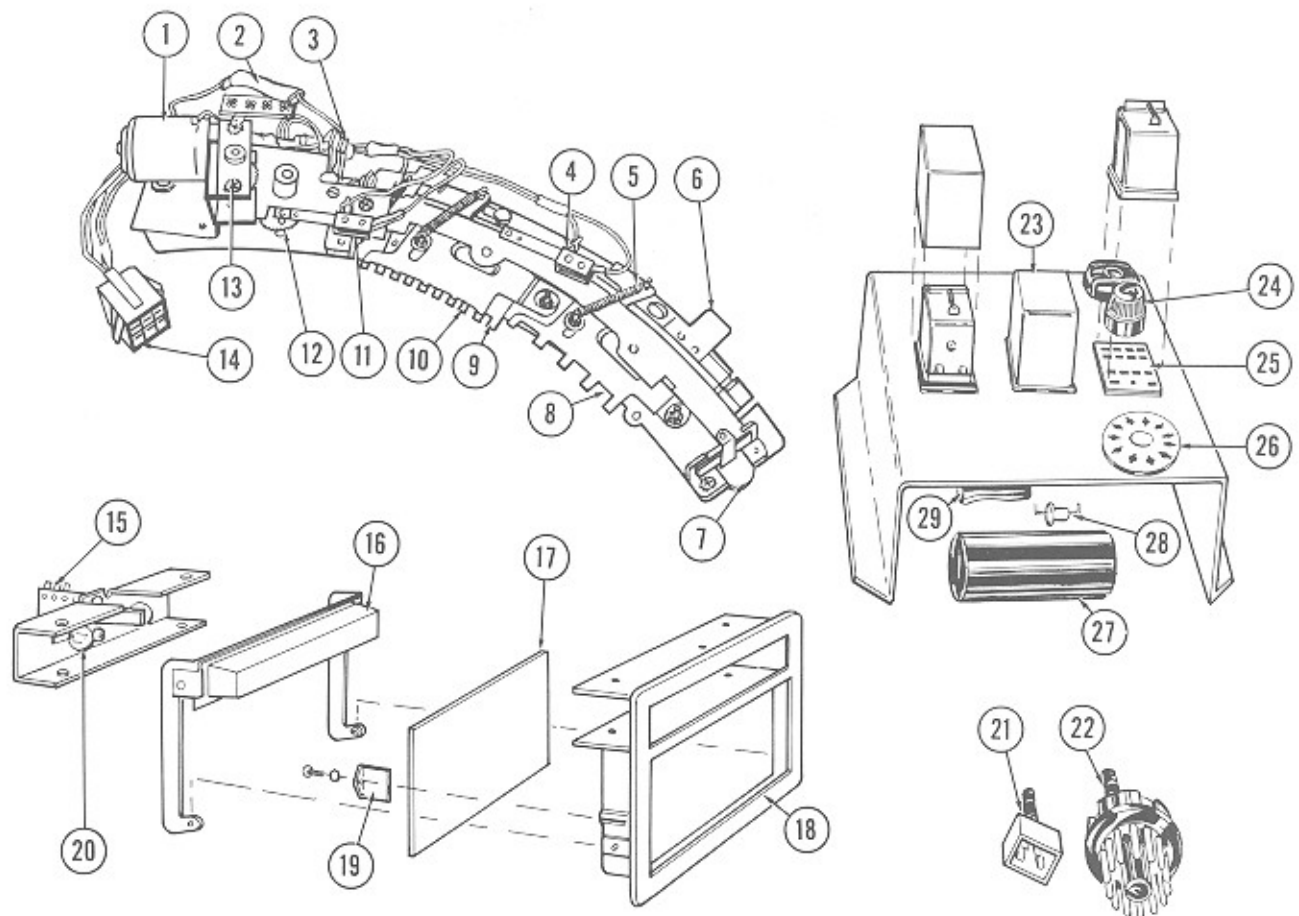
TOP TUNES AND ALBUM AUTOMATIC PROGRAMING ASSEMBLY
